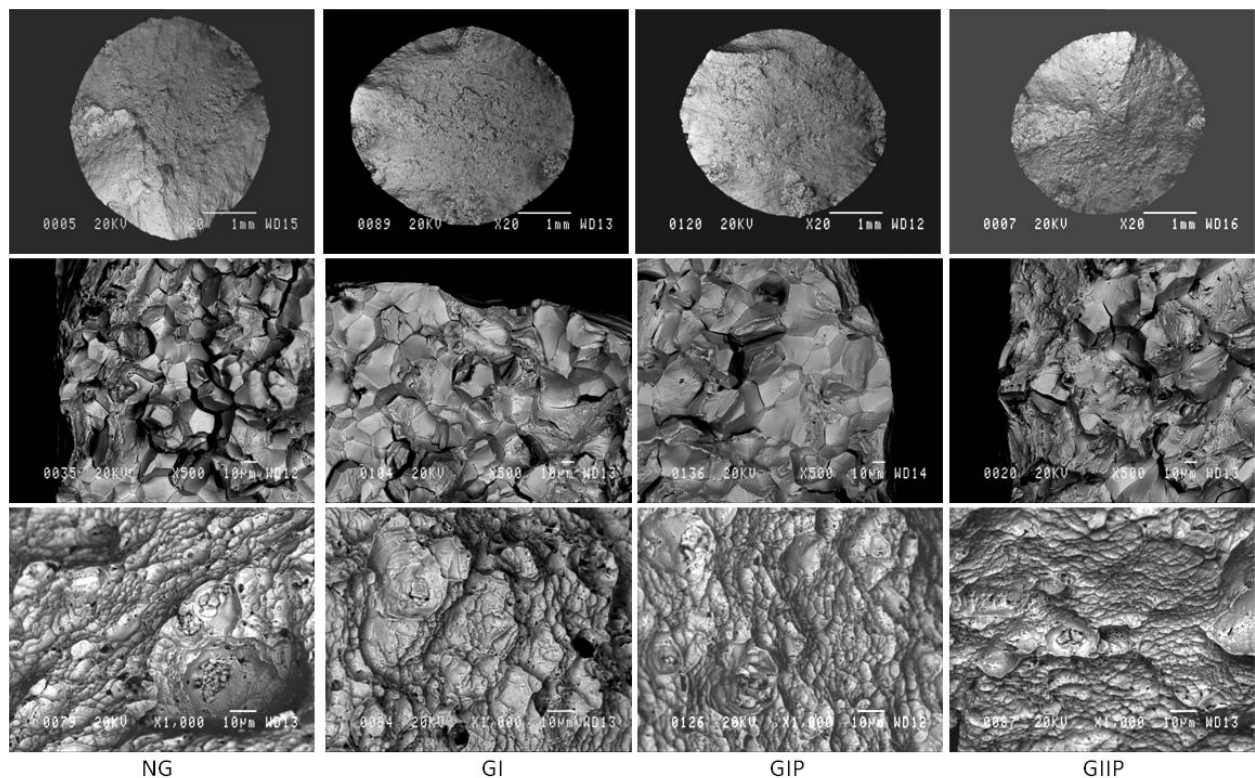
(a).—Typical tensile fracture surfaces, intergranular edge cracks, and central overload regions, for cases with conventional aging heat treatment.
